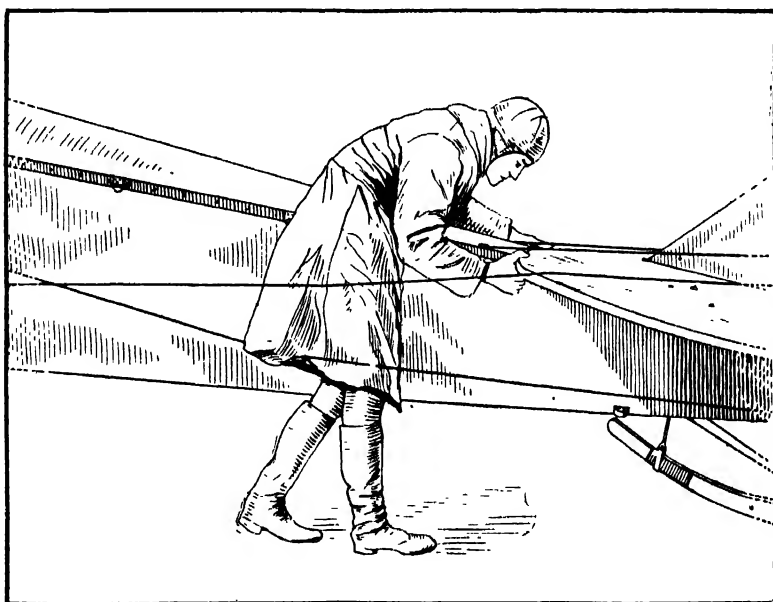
Testing Stabilizer Attachment to Fuselage.
